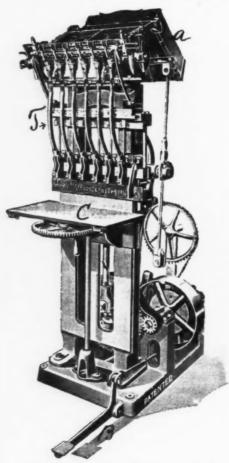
BOX MAILING MACHINE. (Kindness W. S. Bolg Co., Brooklyn, N. Y.)
